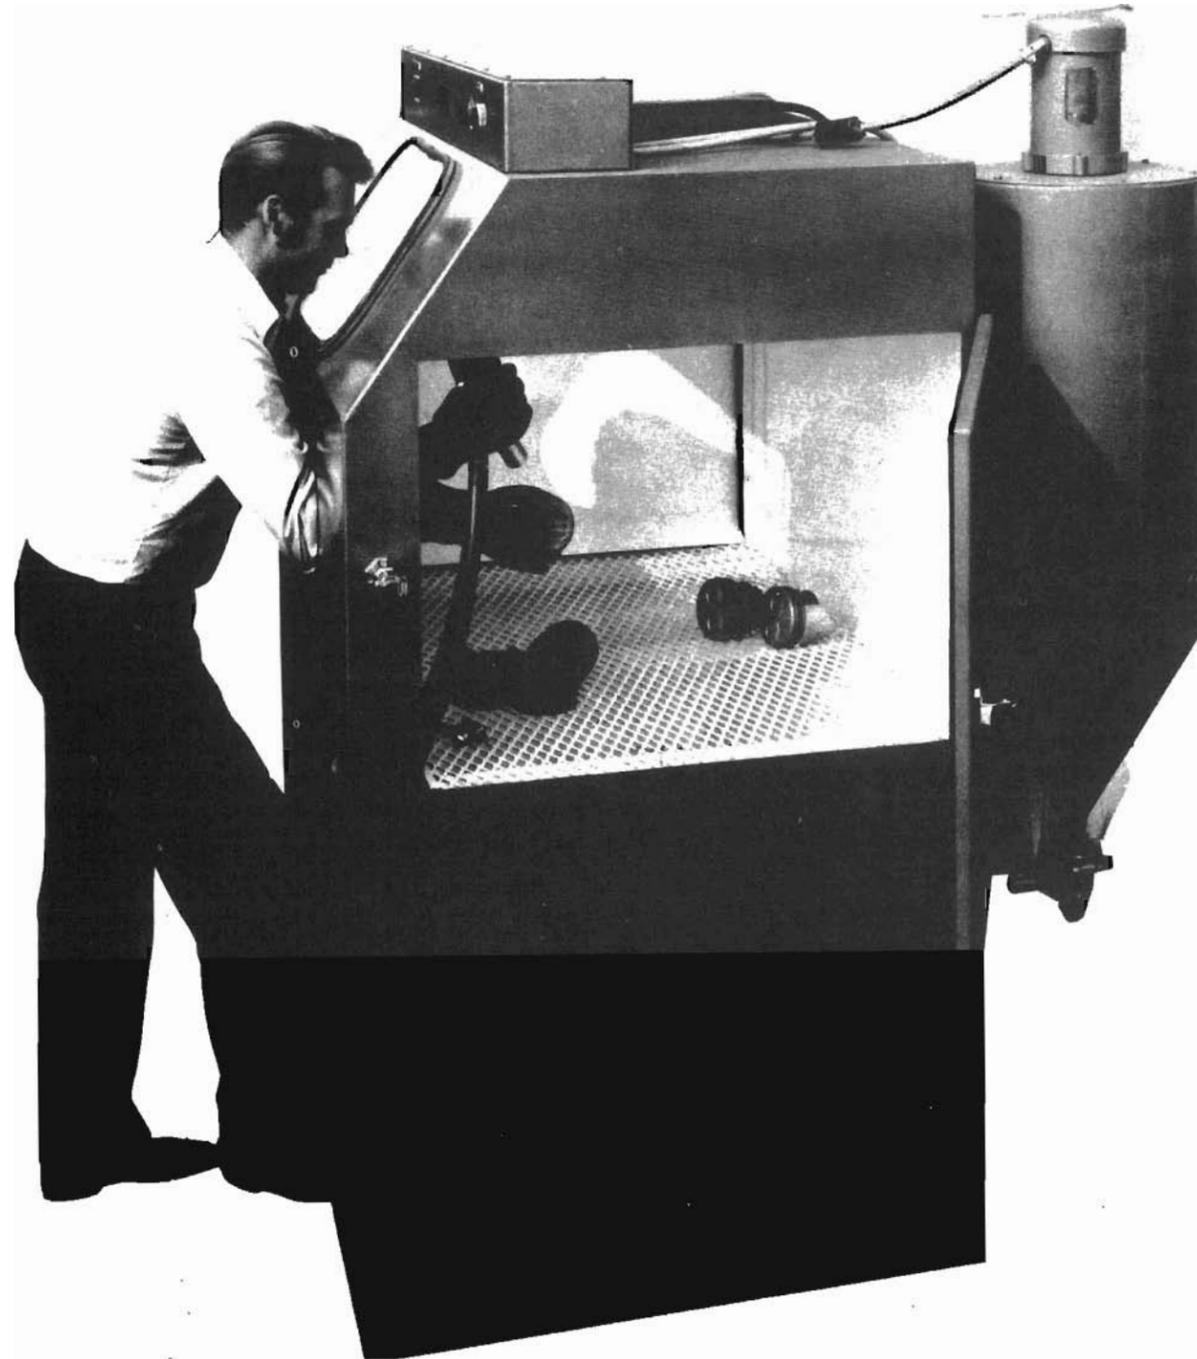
HAND-OPERATED CABINET TYPE BLAST CLEANING MACHINE
